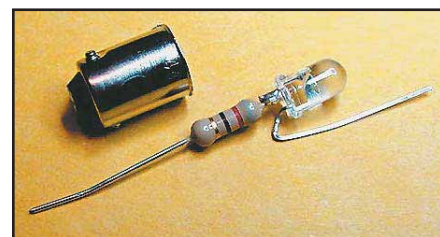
A completed LED and its current limiting resistor ready to be soldered into the bulb base. Note how the leads are positioned for soldering.
